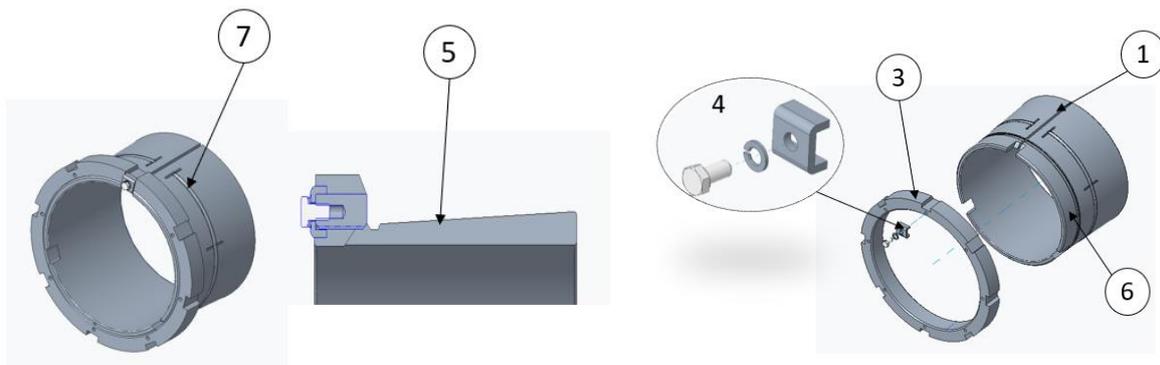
ADAPTER SLEEVE ASSEMBLY WITH LOCKING CLIP
